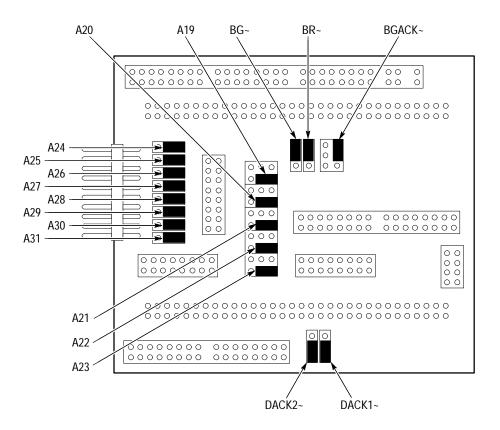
Jumper locations on the 68331/332 evaluation board probe adapter
